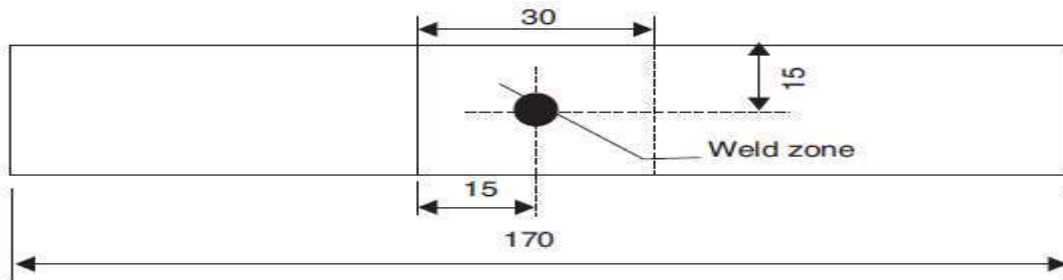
Dimension of lap shear tensile specimen of AA5754/Ni/AA1050 Aluminum alloy sheets ASTM E8M-04 standard [8].
